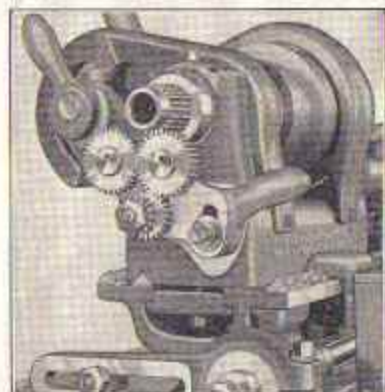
New Twin Gear Reverse Furnished on 1936 Model "Workshop" Lathe
